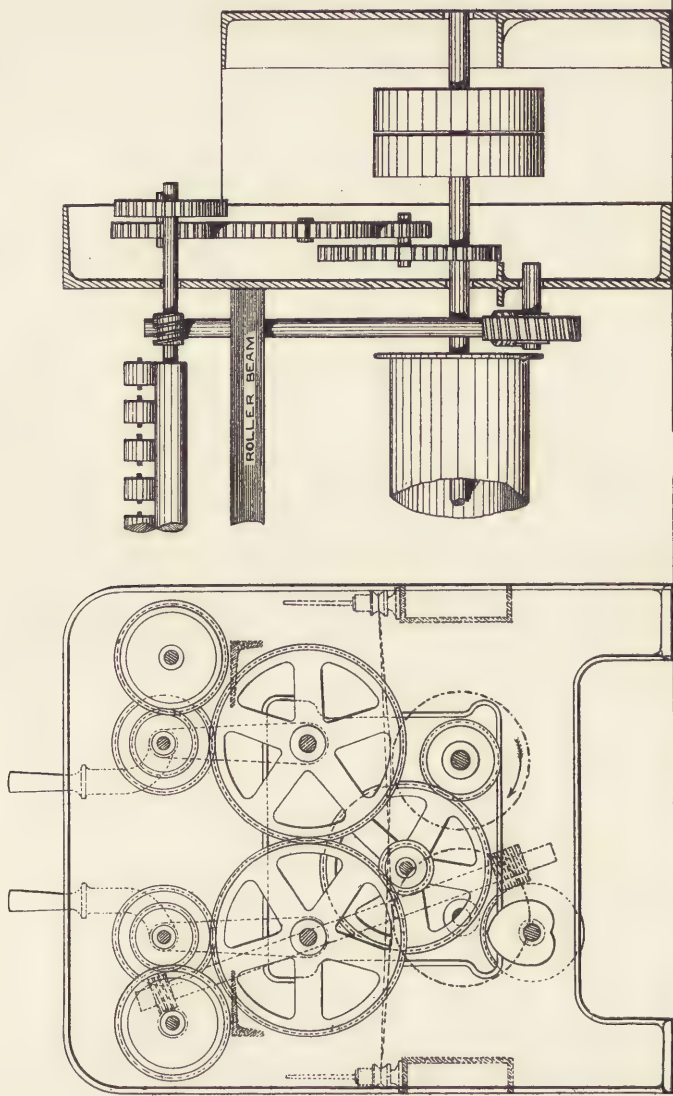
END VIEW AND SECTIONAL ELEVATION OF RING DOUBLING FRAME.
